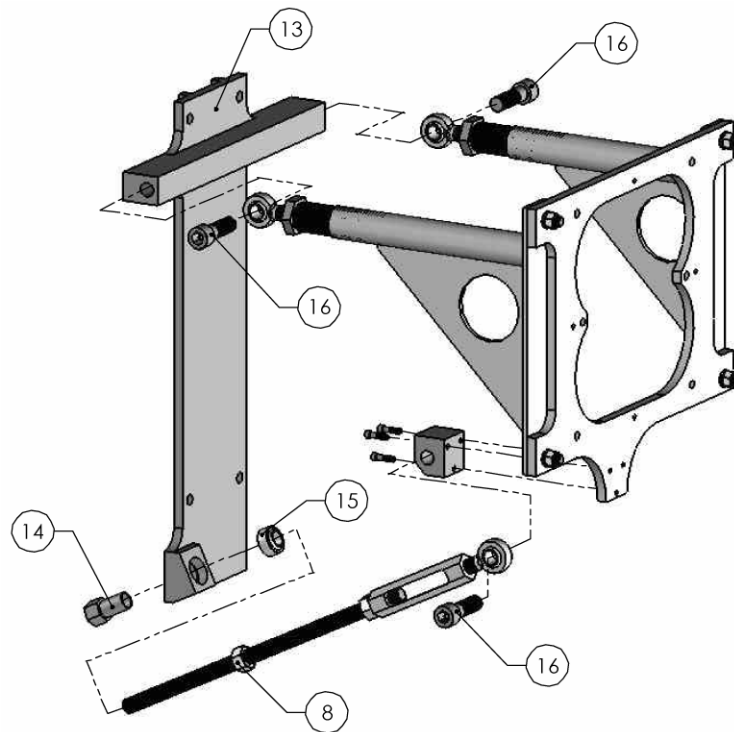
Antenna Mount Plate and Pole Plate Assembly.
